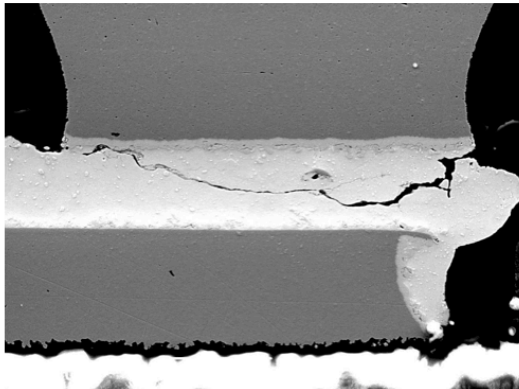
SEM image of solder joint Pin29 in Component U18 on Board F08
